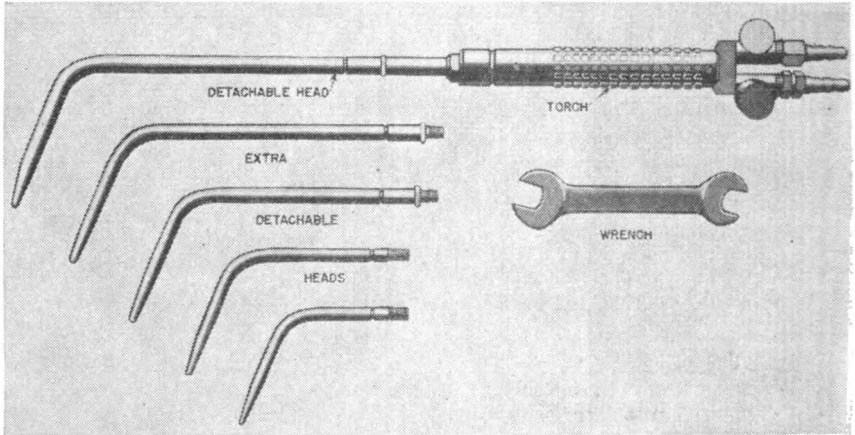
Welding torch with interchangeable heads.
